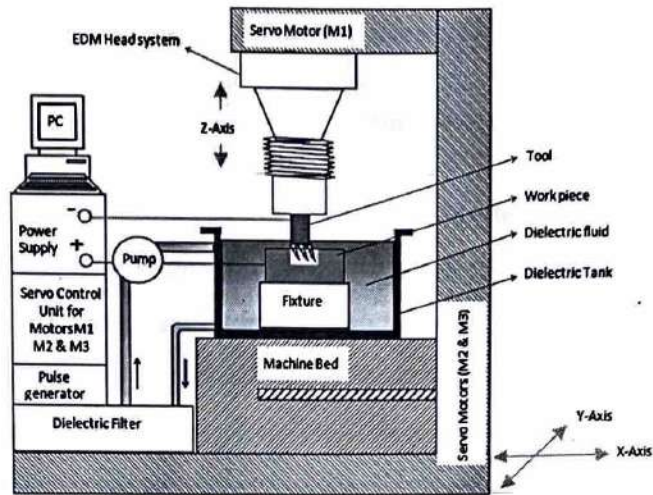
A Schematic diagram of Die-sink Electric Discharge machining (EDM) machine tool (S. Kumar et al., 2016)
